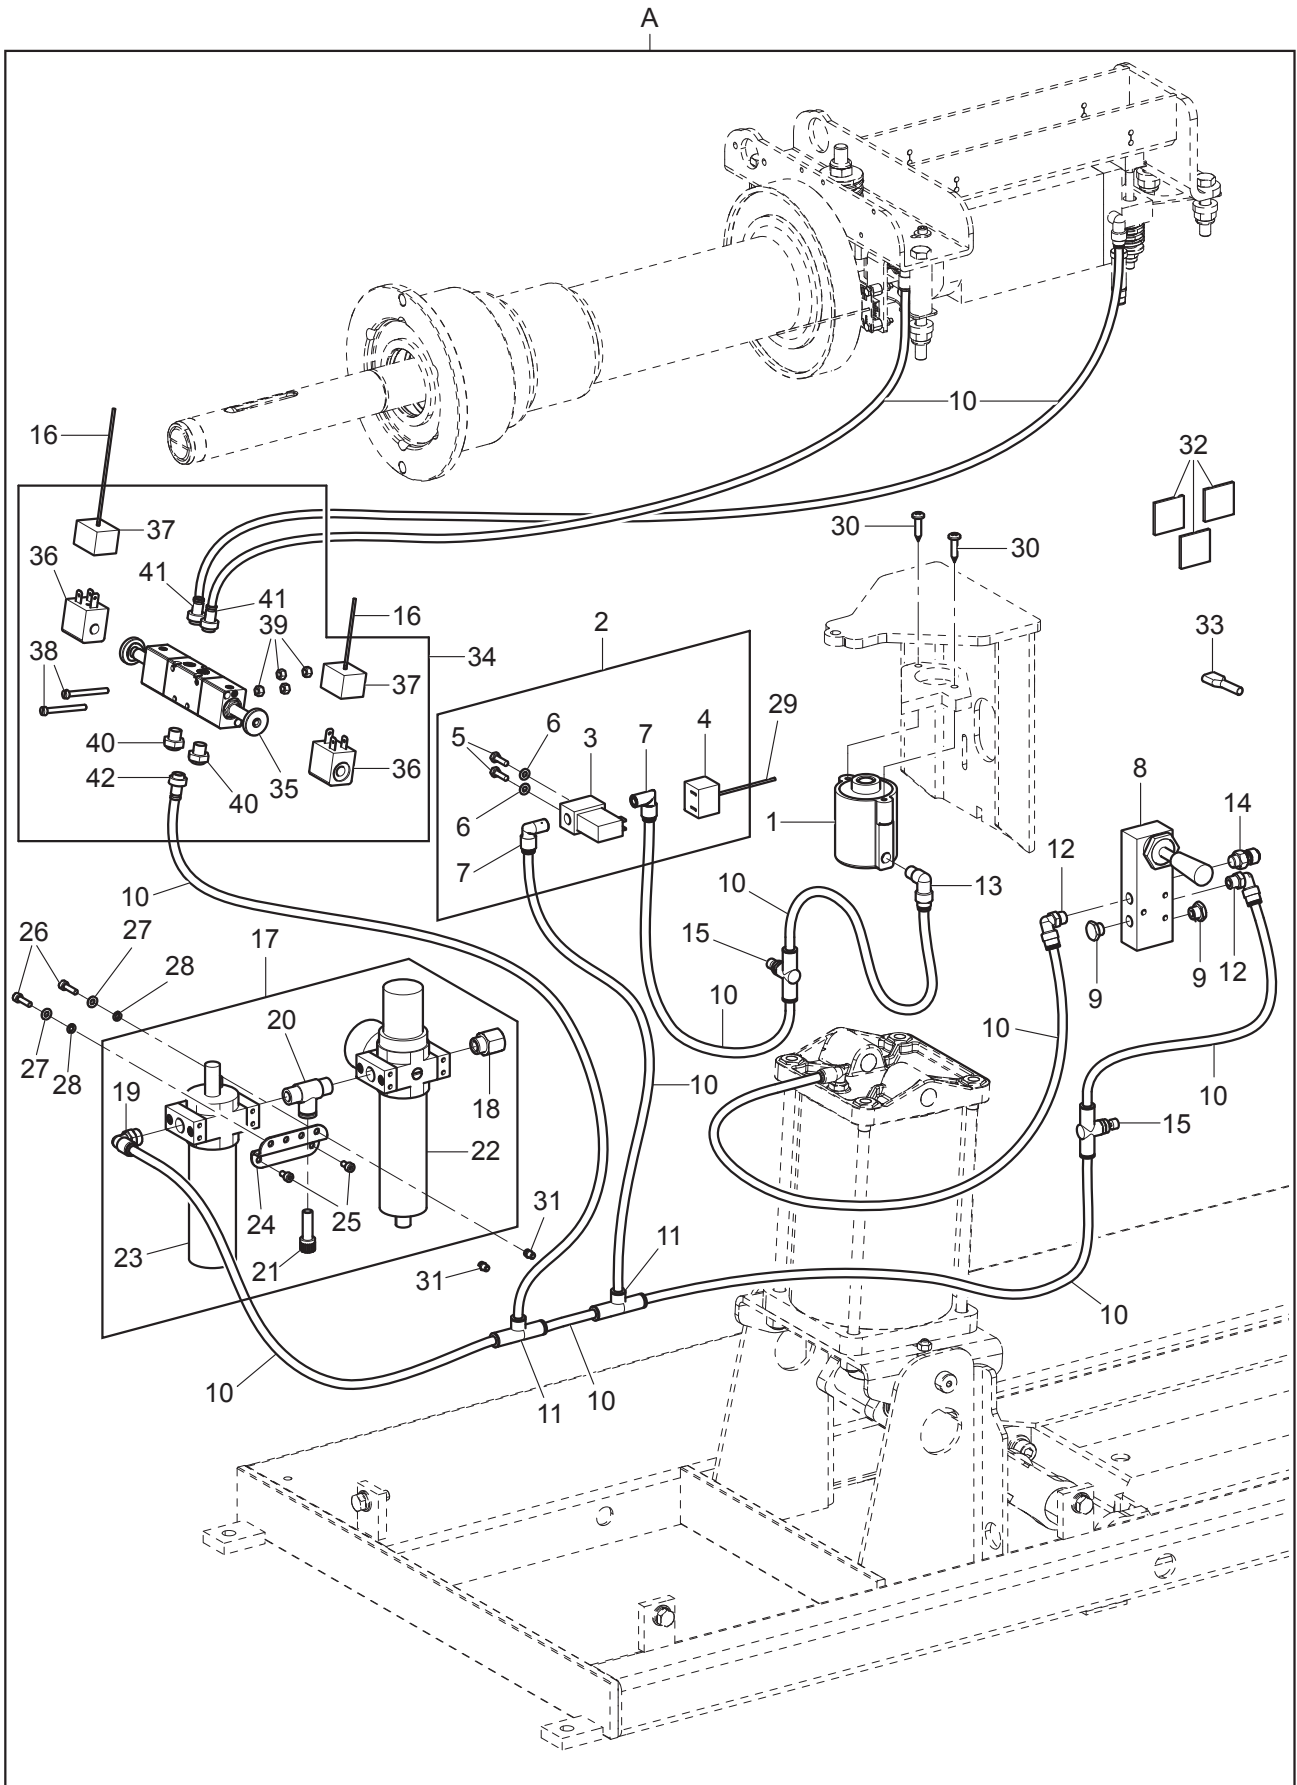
Rev. 0		VS129391752 + VS129390311
